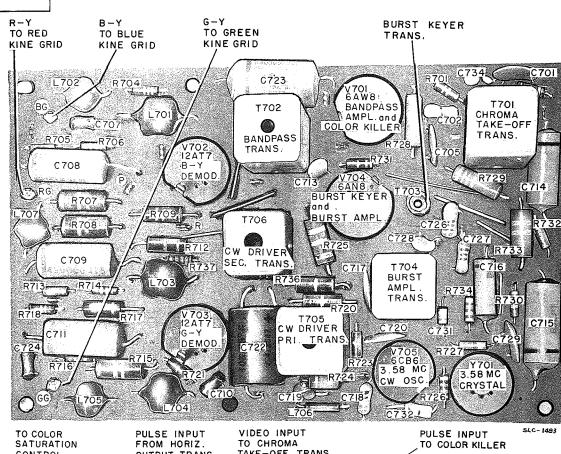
Bottom View CTC5N Chassis, Showing Circuit and Printed Circuit Board Locations.
